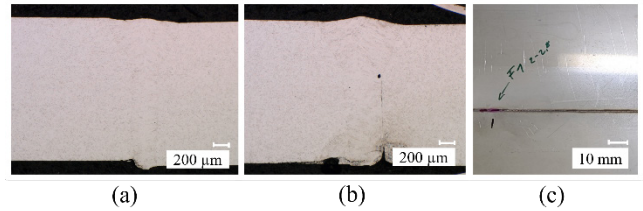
Butt seam laser welding process results. (a) shows the etched cross-section where no defect was found in visual inspection of an acceptable welding result. (b) shows the etched cross-section of a non-acceptable welding result, with pore (type 2011 according to [57]) visible within the weld cross-section. (c) shows a detail of a welding result; incompletely filled groove (type 5011 according to [57]), as defined by visual inspection, is visible at the beginning of the weld seam.
